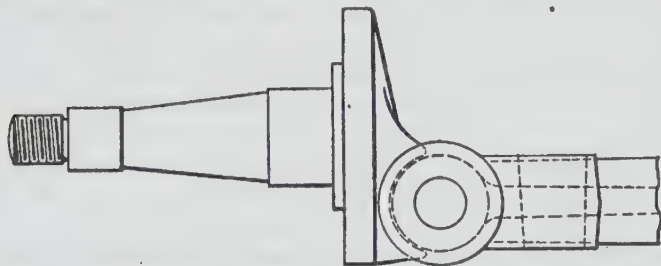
STEERING KNUCKLE WITH SPINDLE SET BACK FROM PIVOT AXIS.
